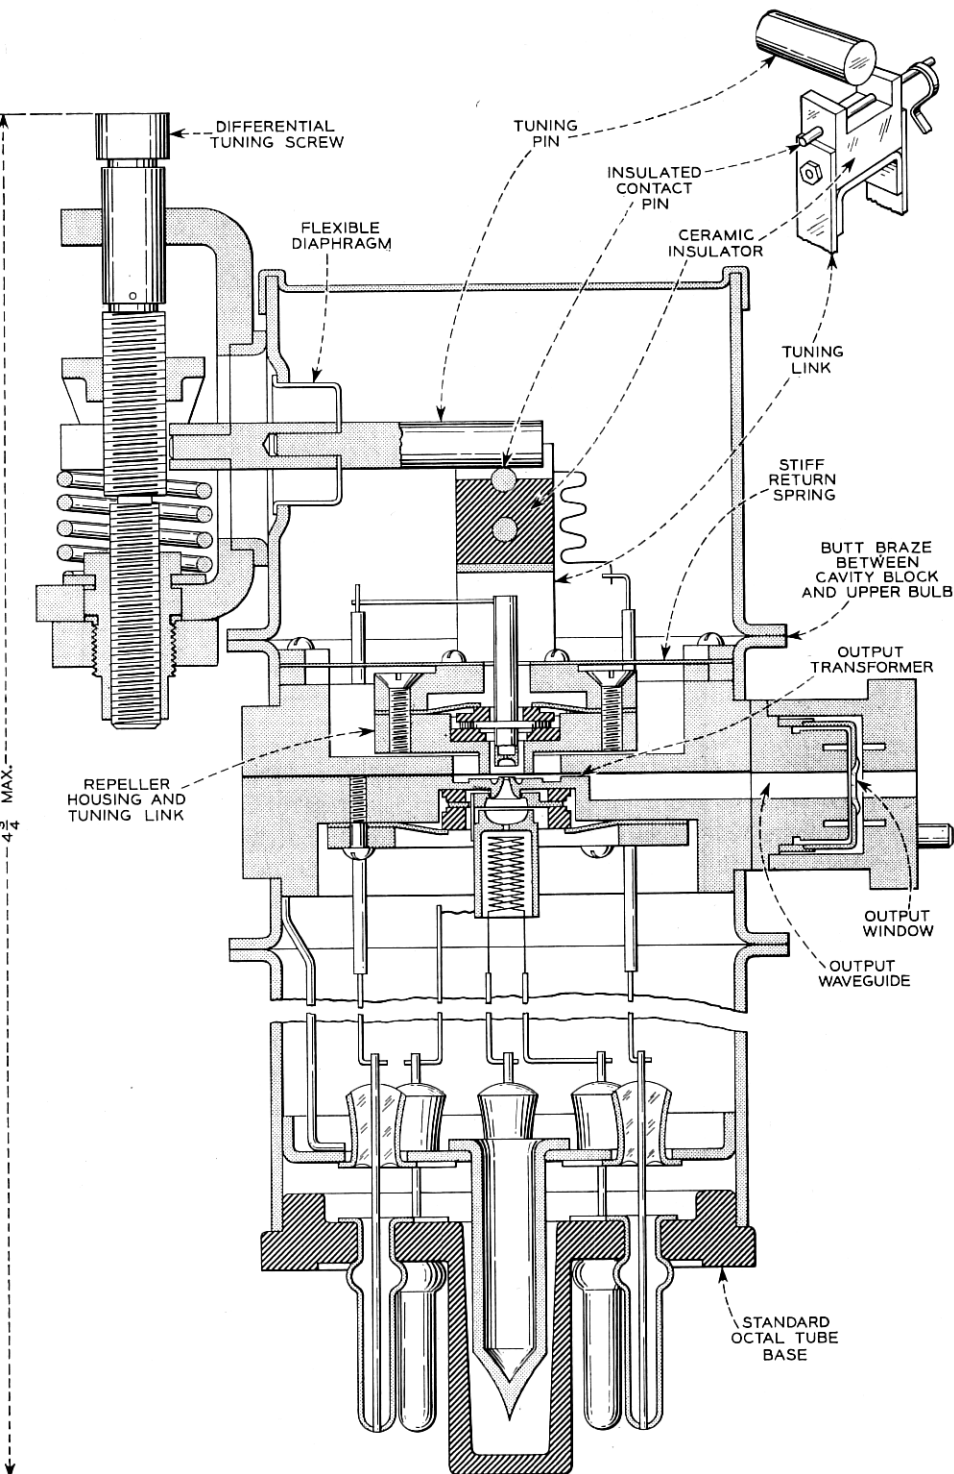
Layout of M1805, millimeter reflex klystron. The enlarged insert shows details of insulated contact pin which forms part of the alarm circuit.
